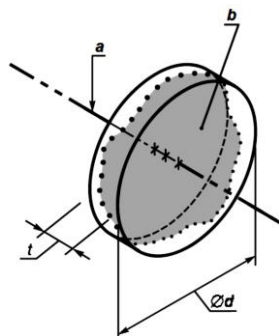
Definition of tolerance zone: a – base D, b – extracted surface
